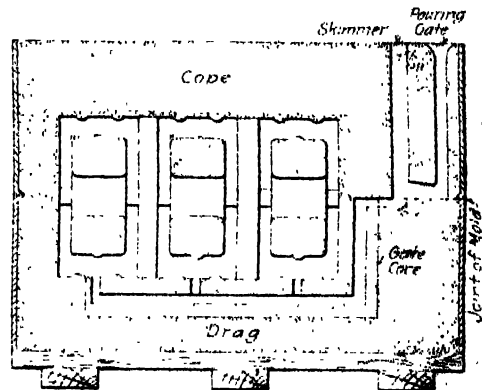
Cross-Section of Mold for Three 10-In. Pistons
